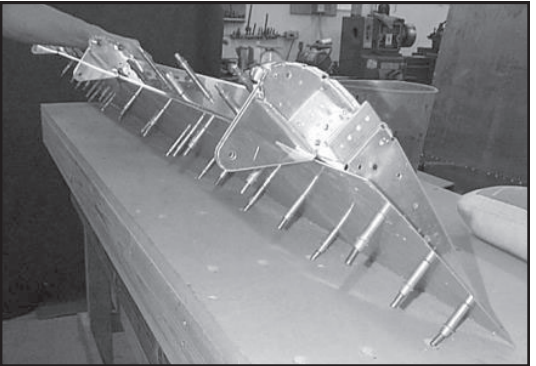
The decoed assembly is flipped over and the decoes inserted through holes drilled in the worktable.
